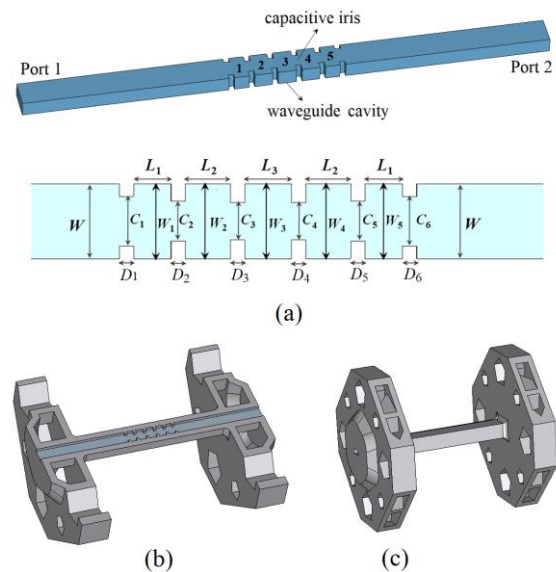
180 GHz waveguide filter structure: (a) Air cavity model of the filter and top view with the dimensional parameters; (b) H-plane cross-sectional view showing internal filter structure; (c) Complete design model with hollowed flanges. The dimensions in mm are: $W = W_1 = W_2 = W_3 = W_4 = W_5 = 1.295$, $L_1 = 0.648$, $L_2 = 0.782$, $L_3 = 0.810$, $C_1 = C_6 = 0.857$, $C_2 = C_5 = 0.688$, $C_3 = C_4 = 0.645$ and $D_1 = D_2 = D_3 = D_4 = D_5 = D_6 = 0.250$.
